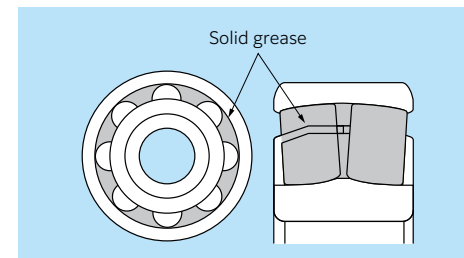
Spherical roller bearing with full-pack solid grease (Available for spherical roller bearings)
